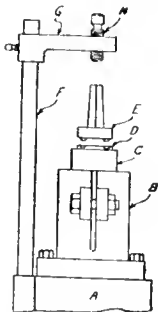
JIG FOR SCREWING IN STEEL BASE PLATES.
